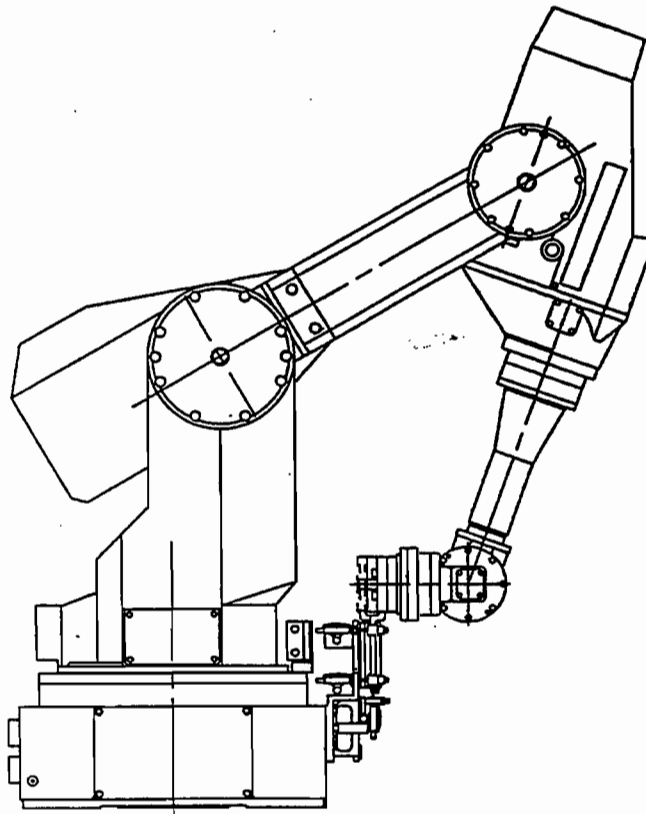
(d) Mounting fixture on wrist (S-700)
